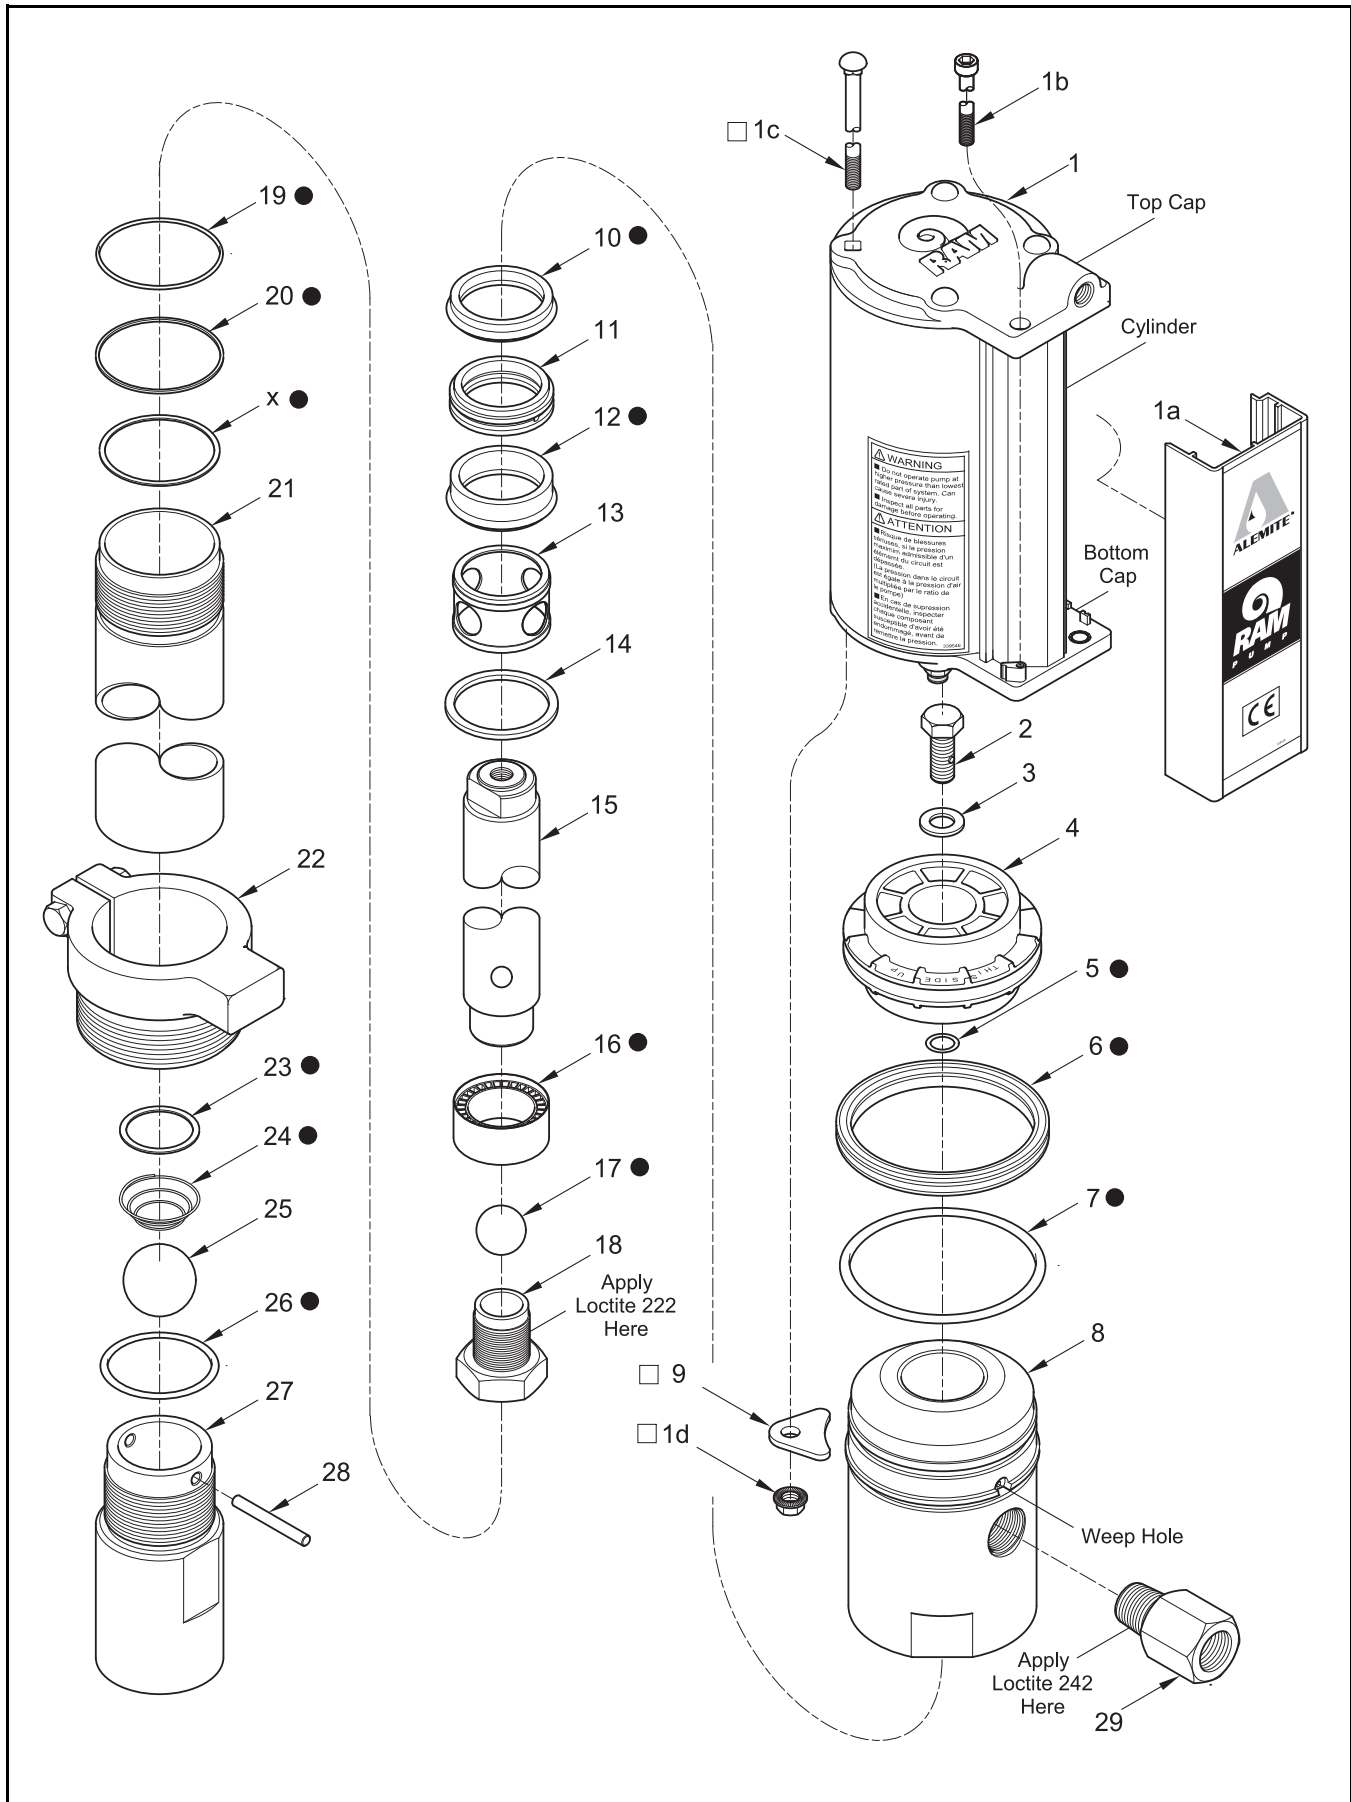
Low-Pressure Stub Pump Model 9968 Series - Exploded View
